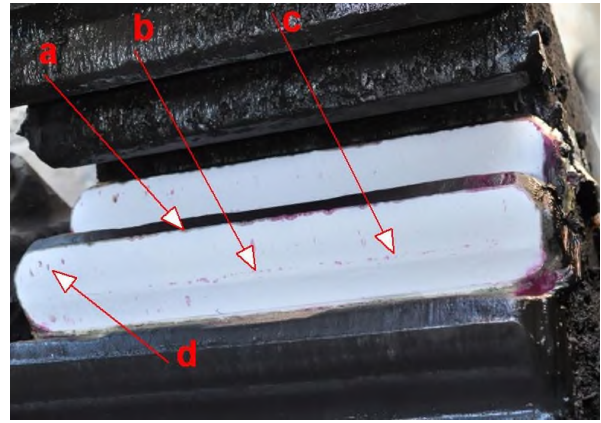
Defects highlighted on the pinion that operates the lifting–descending mechanism arm
